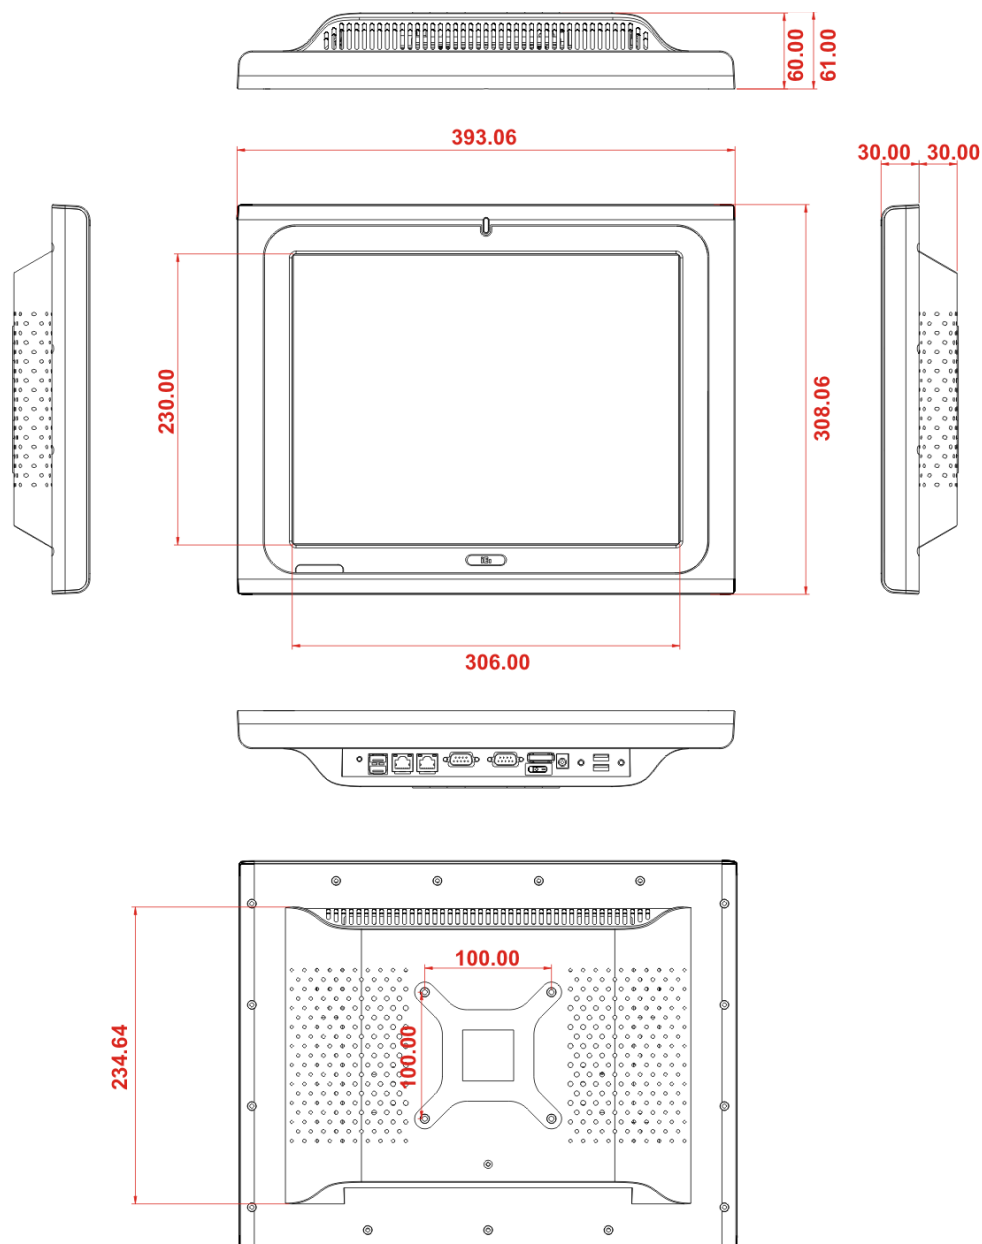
AFL-15A-CX Dimensions (units in mm)
